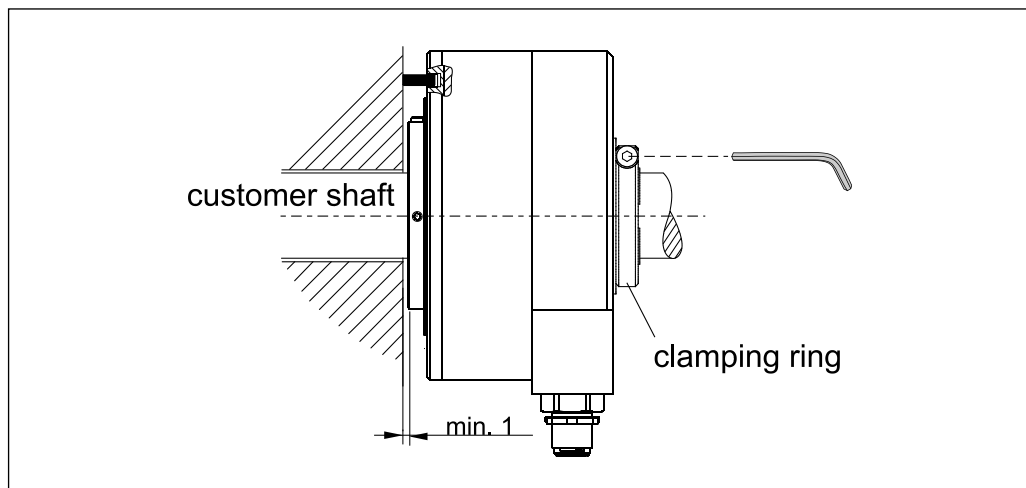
Type with dowel pin and groove application in assembled condition with  $\varnothing 25H7...40H7$
